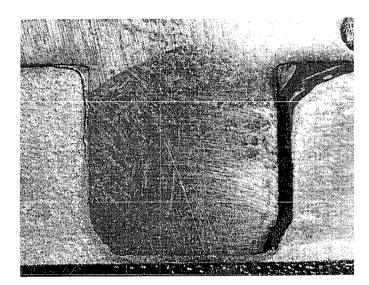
Cross section of unthreaded nib frozen during weld. Advancing side is on right. Note complete absence of rotational zone around pin tool and copper tracer (note arrow) smeared along pin tool rather than broken into pieces.
